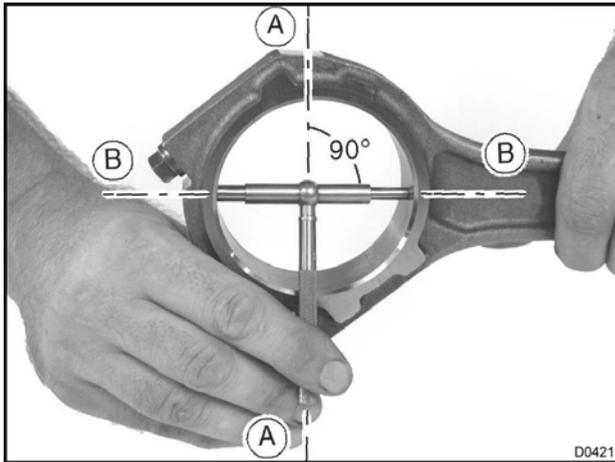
Measurement for out-of-round of bore of connecting rod bearing
